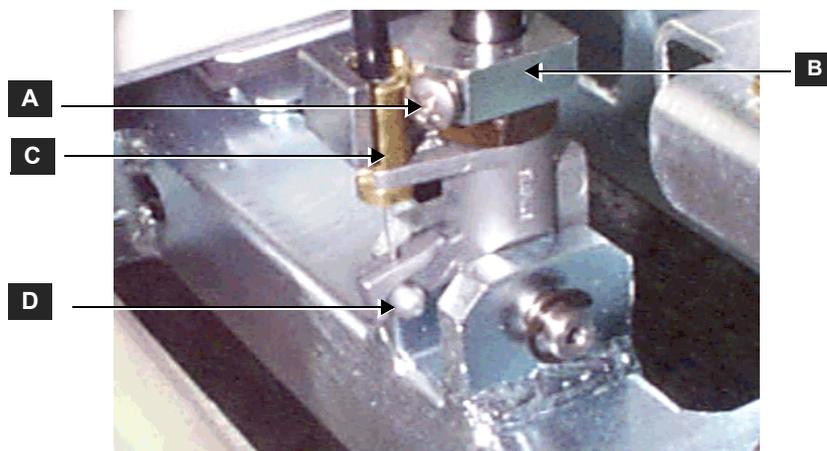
Gas Spring Rod and Cable Holder - Lower End (from Rear)
